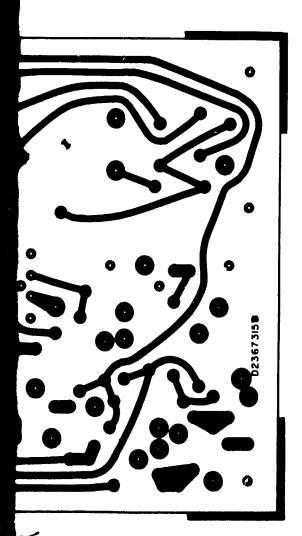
Printed Wiring Board (Master) (D2367315) (Sheet 3 of 3)
